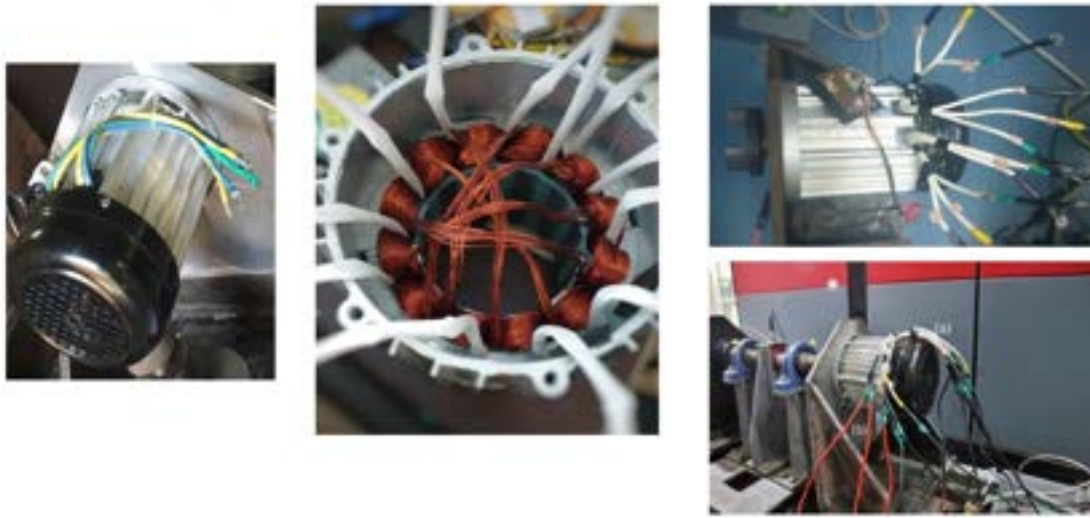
Photograph of rewinding the conventional SRM to HESRM (a) Main winding. (b) Auxiliary winding.
